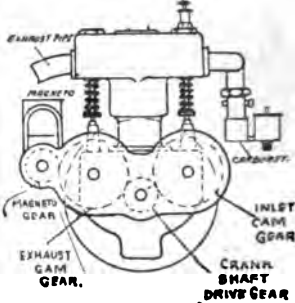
Showing method of driving the two cam shafts and magneto on a "T" head engine.
